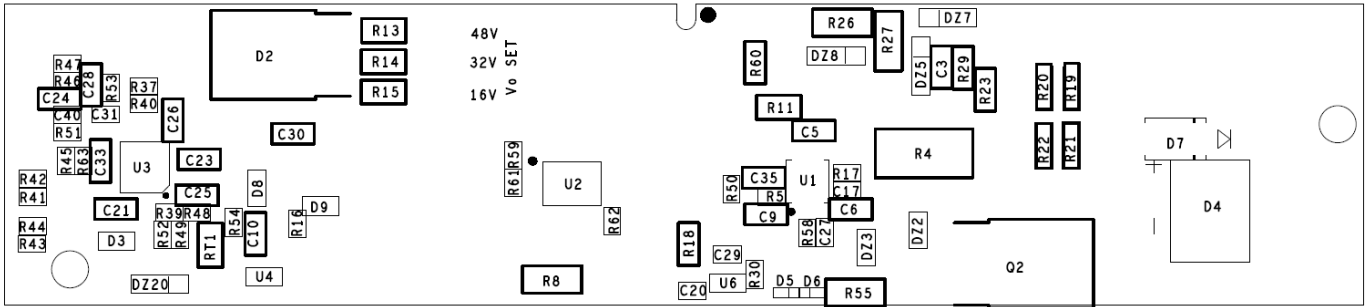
DRAWING OF ASSEMBLY ON BOTTOM
